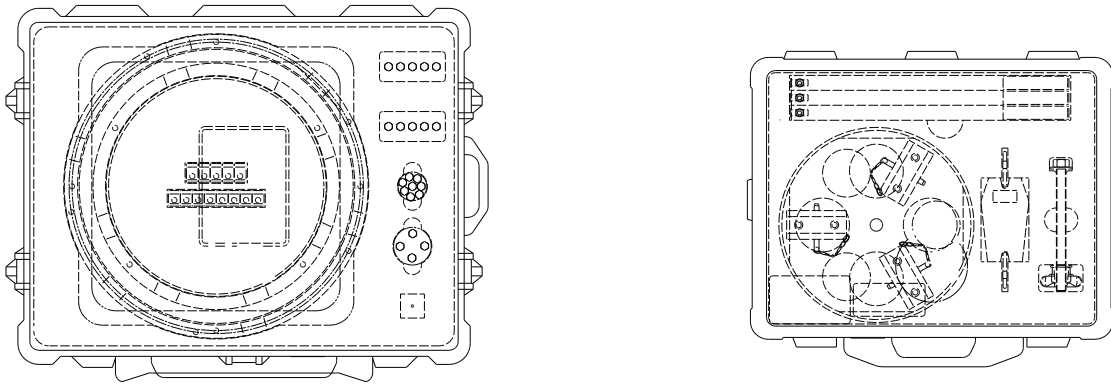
TOOL KIT, SWASHPLATE ASSY ASSEMBLY
